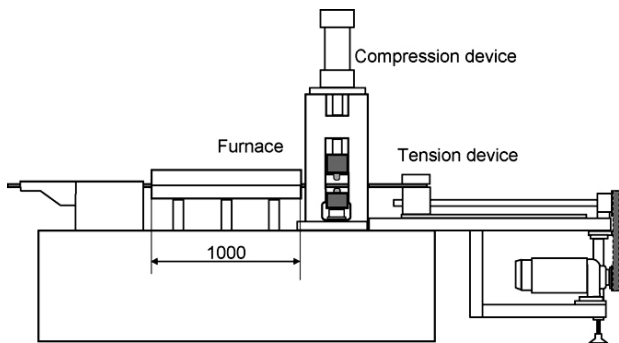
Schematic representation of hot flat strip drawing test machine [6]
